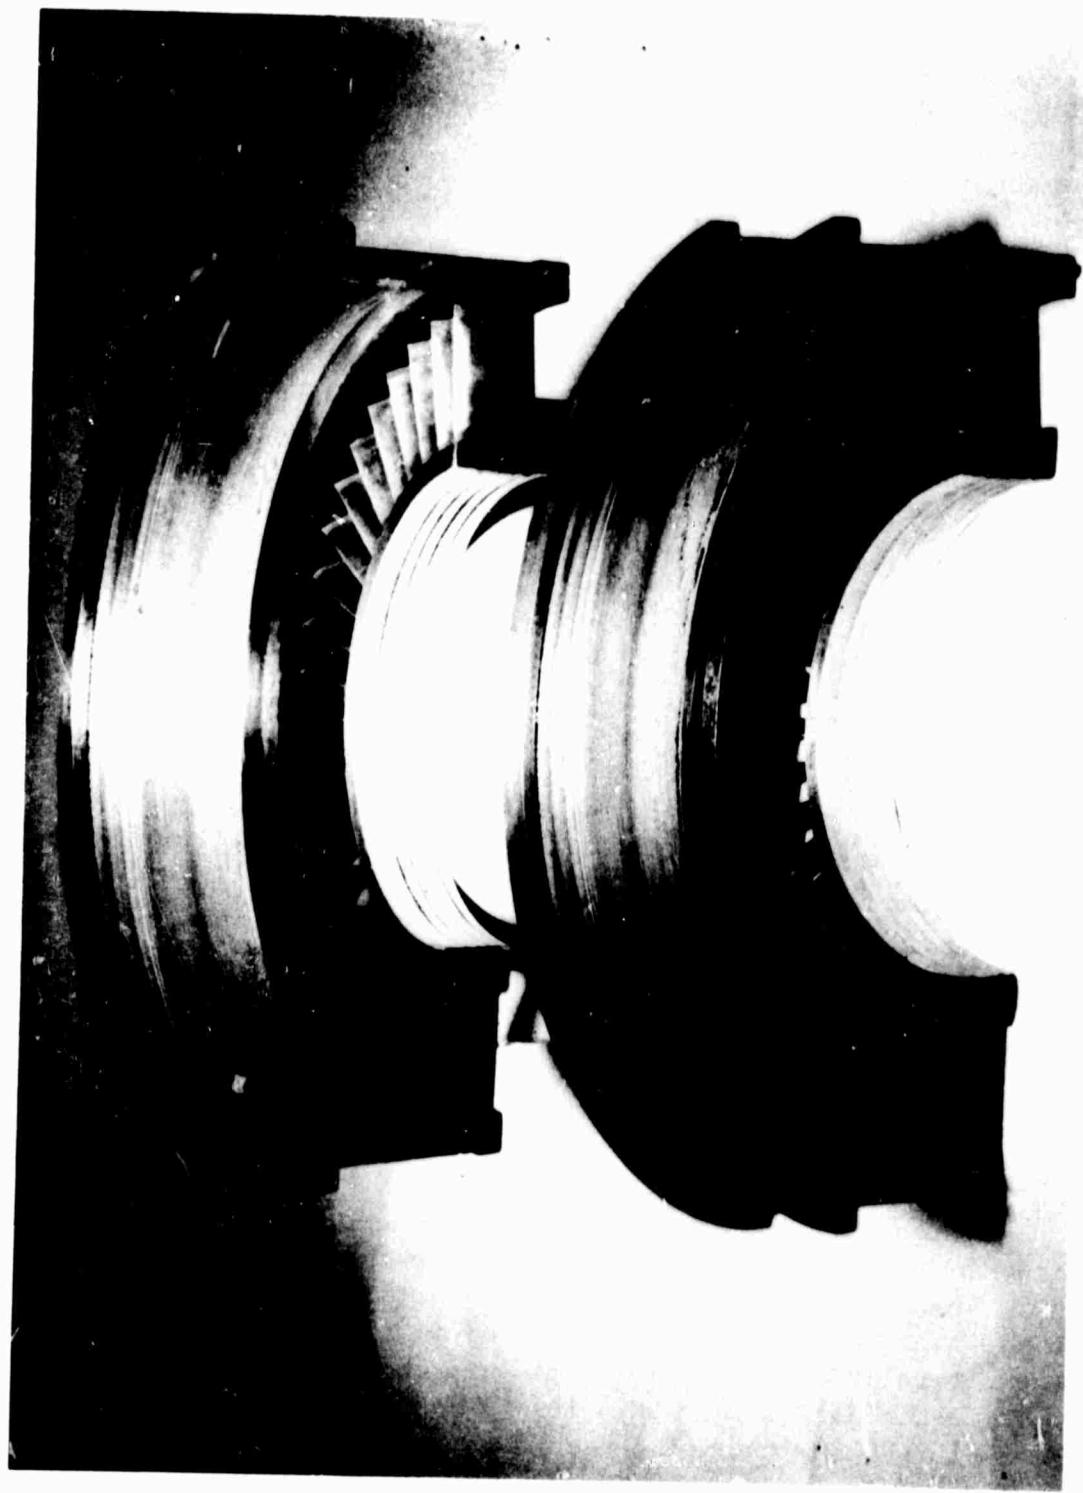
First-Stage Stator Assembly Showing Deep Groove on Labyrinth Seal Rub Ring.
